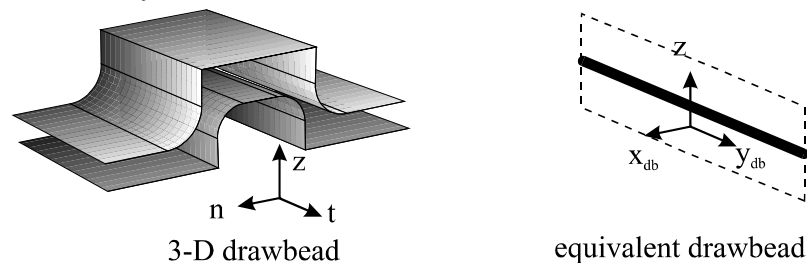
Schematic drawing of a 3-dimensional drawbead and its equivalent drawbead representation
